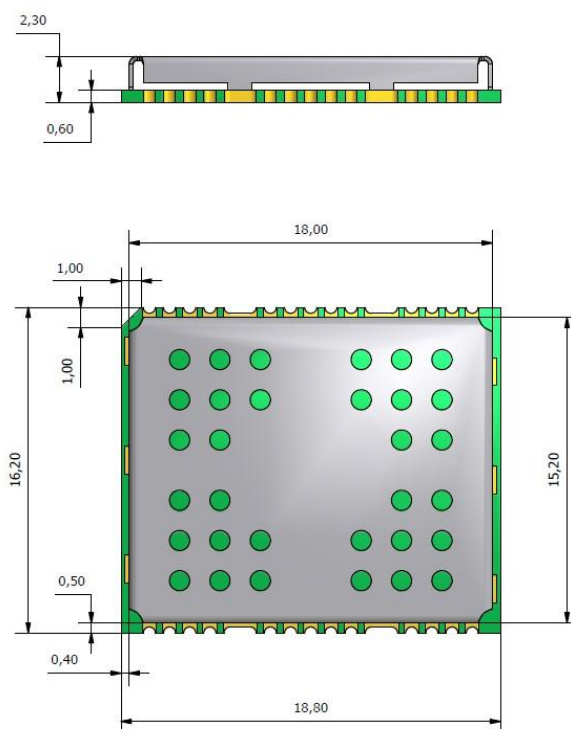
IT500 nominal dimensions (all dimensions in mm).
